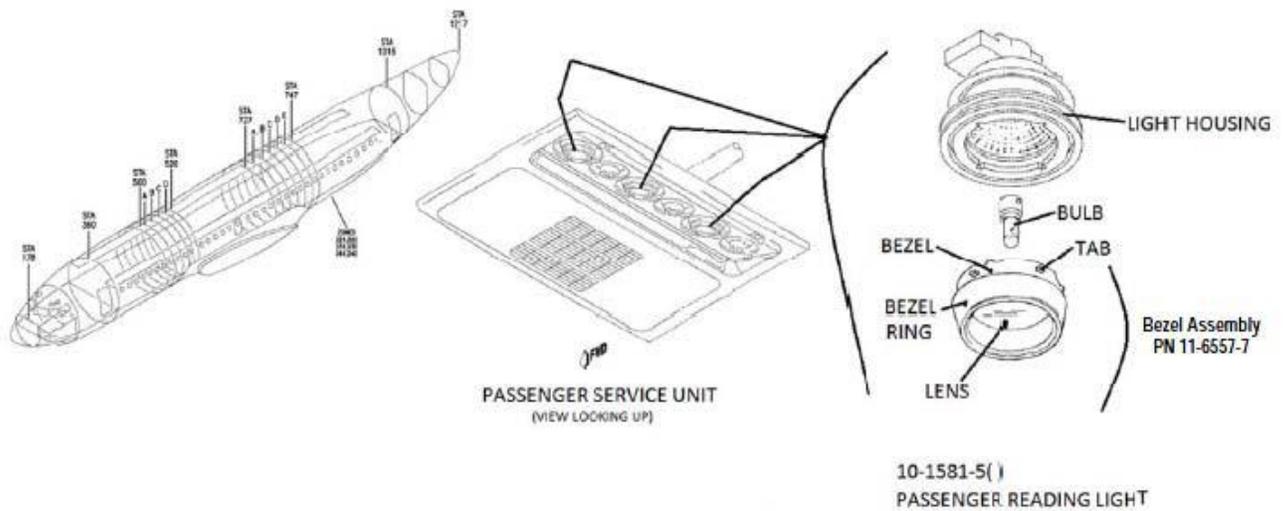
Typical Installation of PMA PN 11-6557-5( )WD Bezel Assembly
